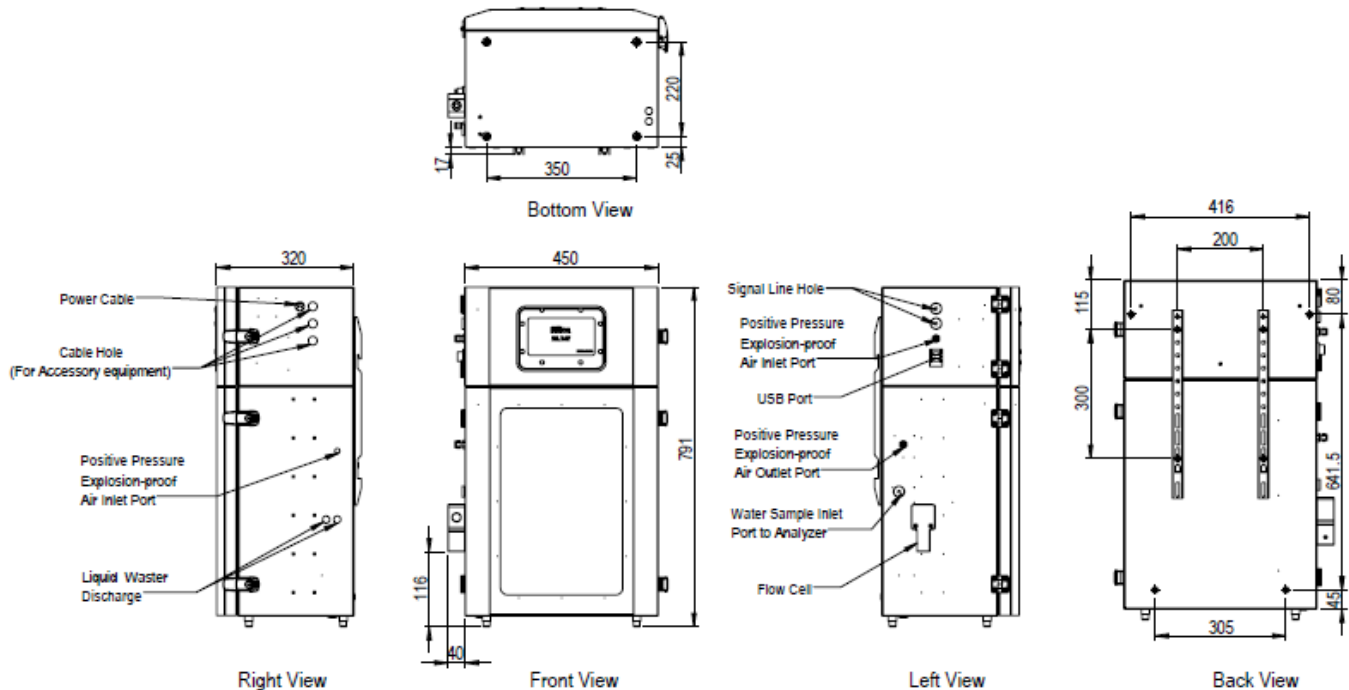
Silica Analyzer Installation Dimensions and Ports (Unit: mm)
